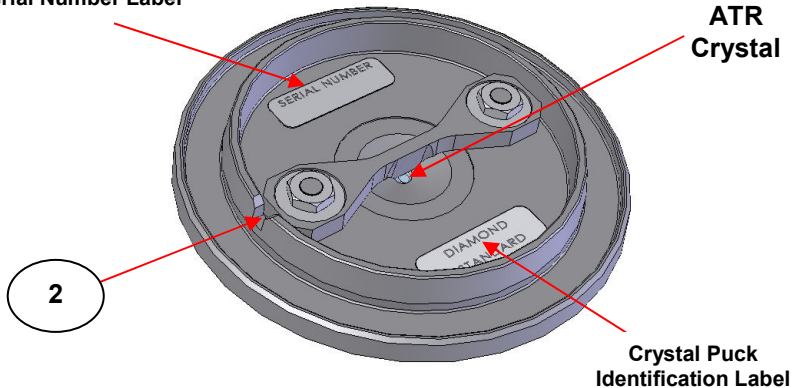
Underside view of Quest ATR Diamond Crystal Puck Assembly
